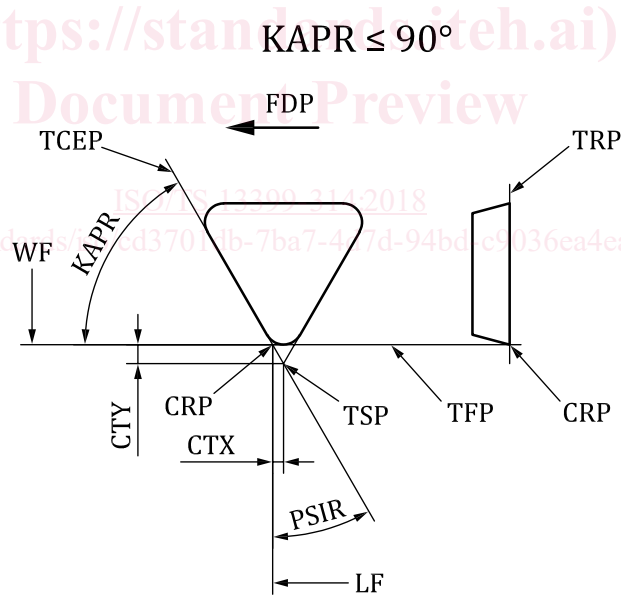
Feed direction parallel to tool axis — $KAPR \leq 90^\circ$
